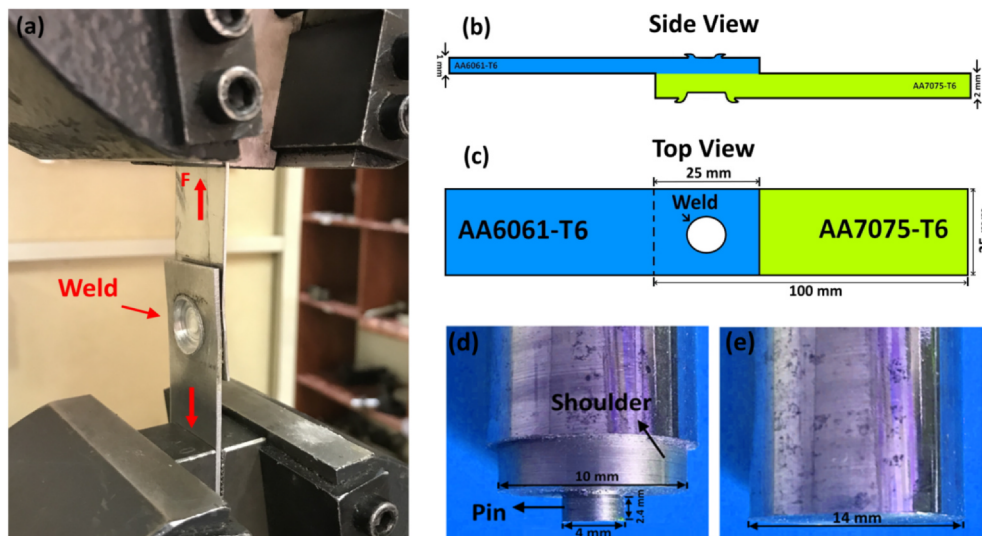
(a) Tensile/shear Machine. (b) and (c) The schematic and dimensions of the Tensile/shear test. The tools used in the (d) first step and (e) second step.
